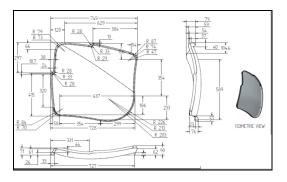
Solar Panel support Plate drawing b No. of draws can be calculated by relation below
